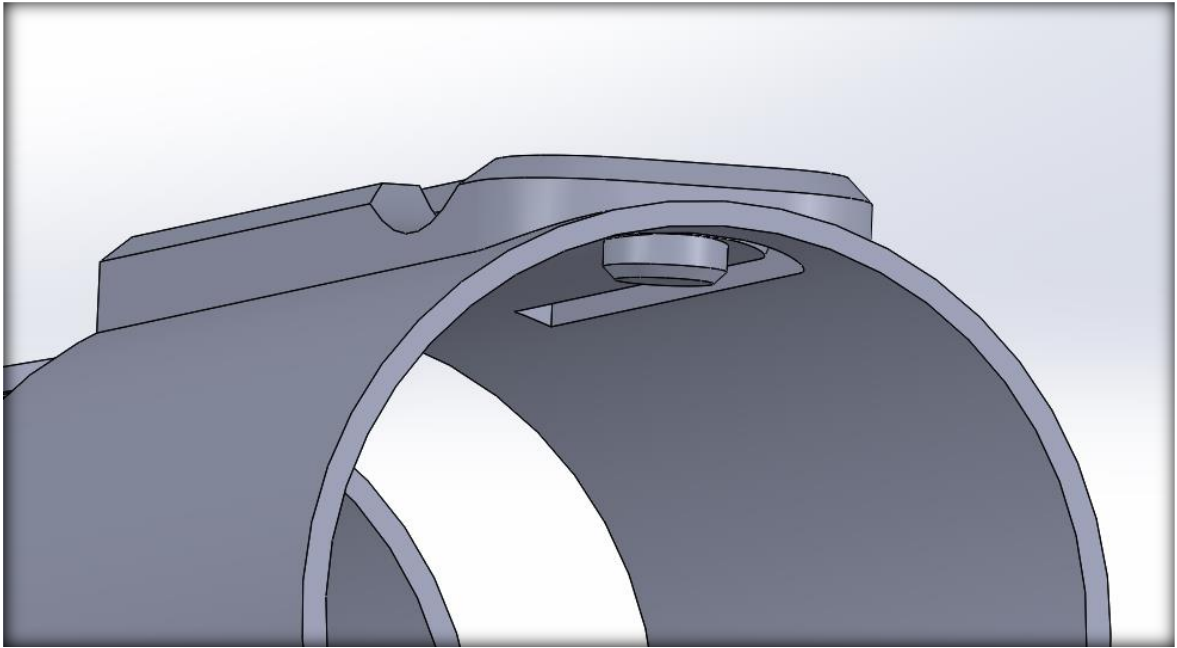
Rake head attachment by combining snap closure to the rake head (rake head is “cut off” to demonstrate the push pin location)
